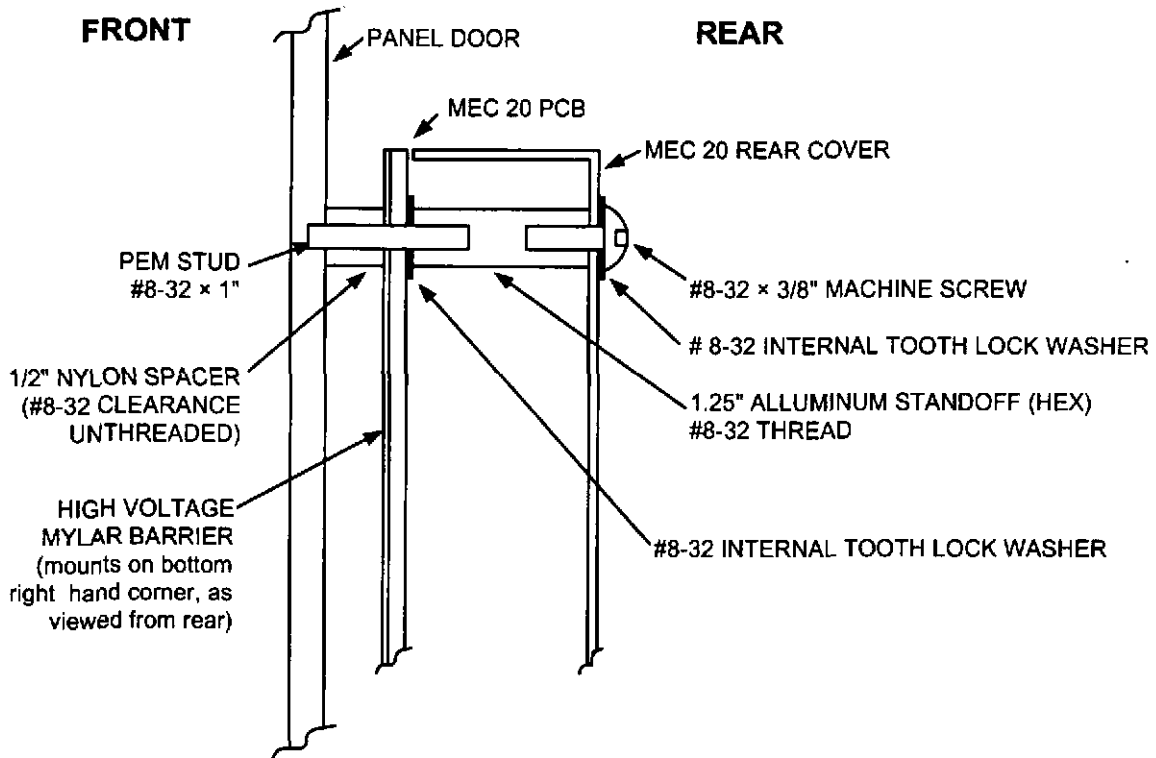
MEC 20 EXPANSION MODULE MOUNTING DIMENSIONS
